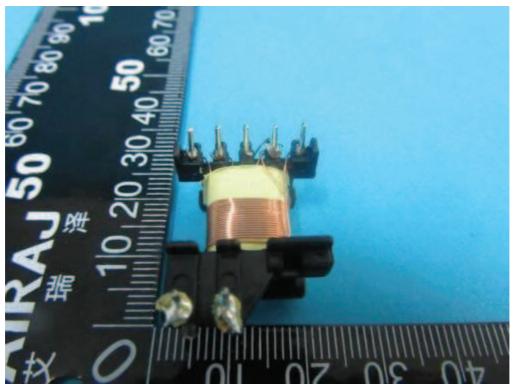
Detail view of transformer (for 90E12PU05-xxxx)
